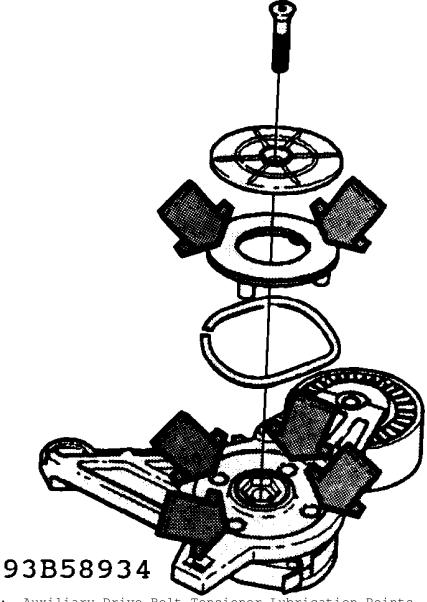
Auxiliary Drive Belt Tensioner Lubrication Points Courtesy of Volvo Cars of North America.
